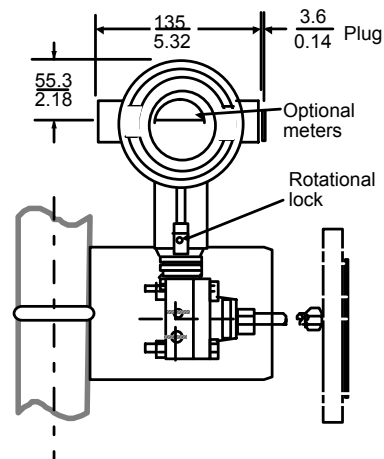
Approximate horizontal mounting dimensions for Remote Seal Transmitter.
